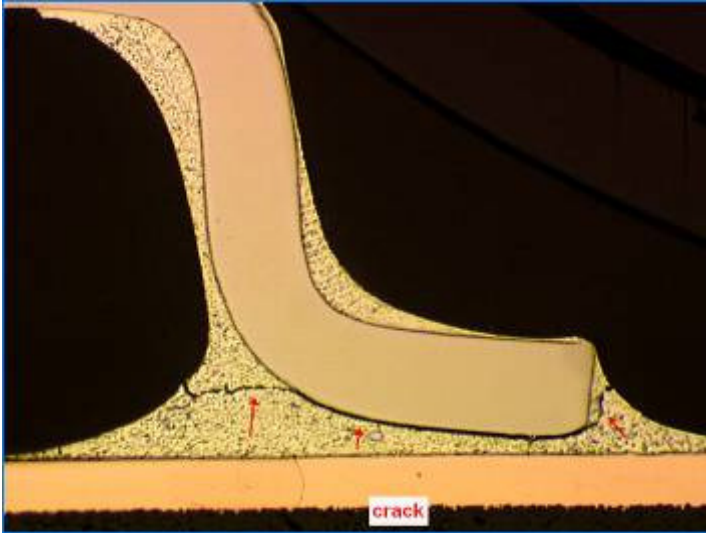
cross section, SN65, U61, right lead and solder crack, 100x
